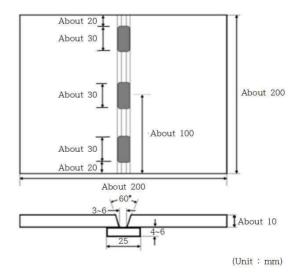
Dimensions and types of test assembly for tack butt welds
